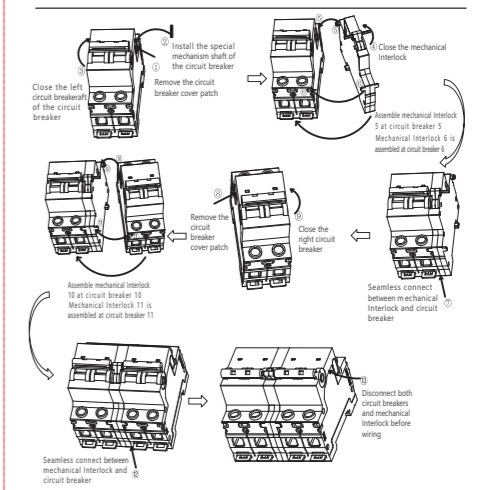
LMI-B1 / XB mechanical interlock assembly mode diagram
